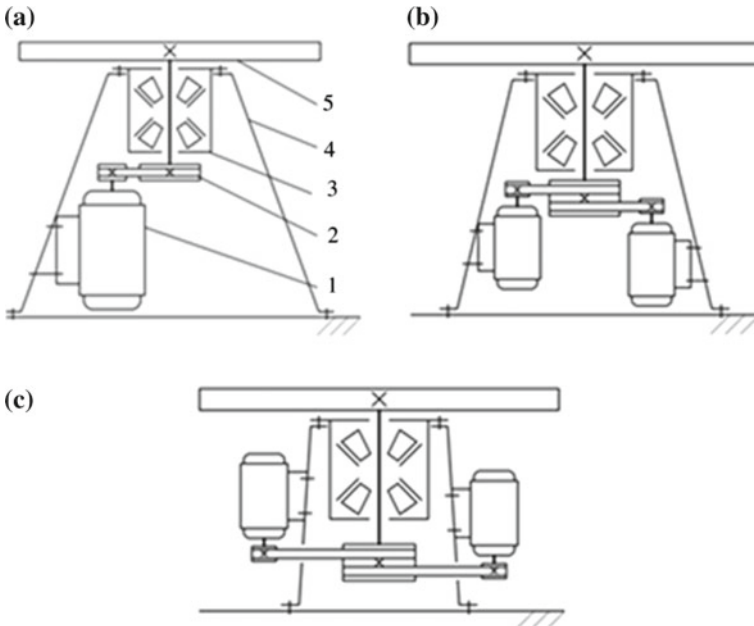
Configurations of centrifuges with belt drive: a with one drive motor; b, c with two drive motors; 1 electric motor, 2 belt drive, 3 spindle, 4 housing, 5 rotor
